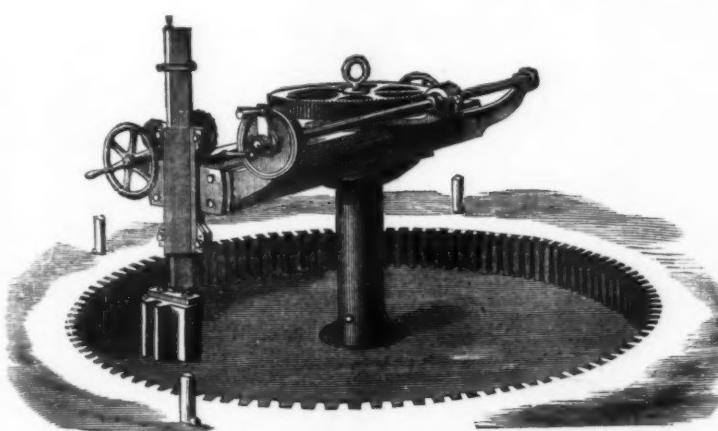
SCOTT'S IMPROVED WHEEL-MOULDING MACHINE.—FIG. 2.
